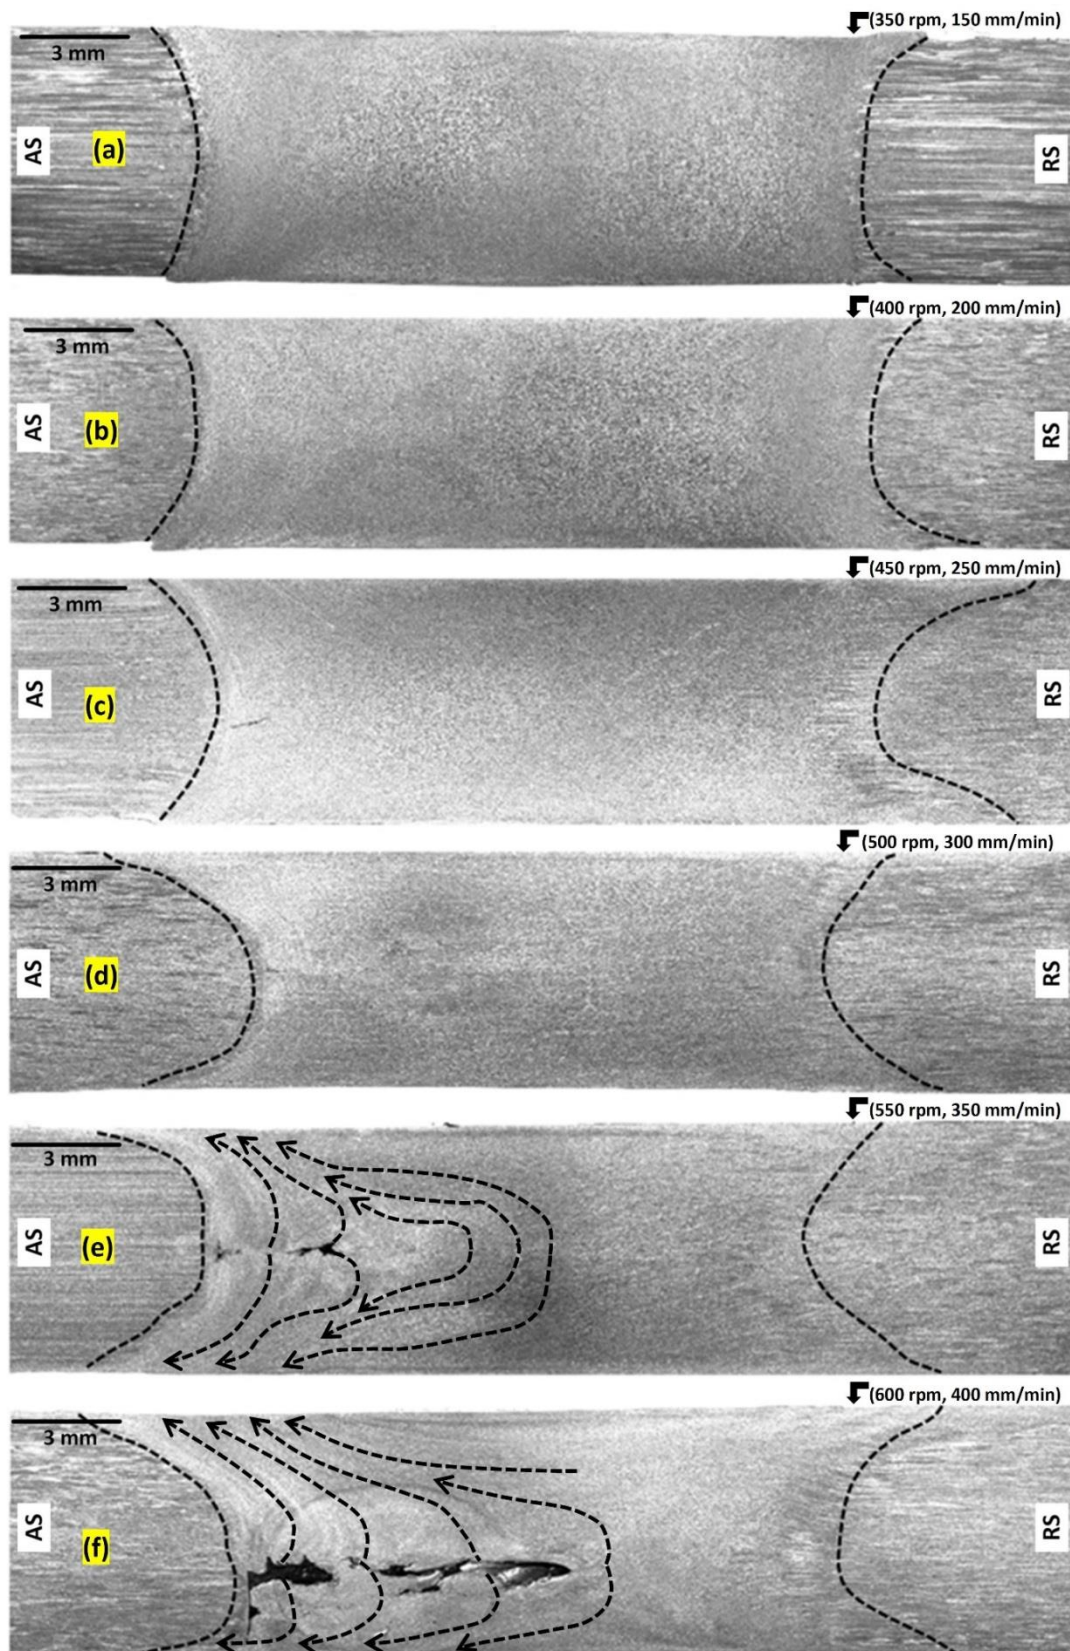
Macro-etched cross-section of the AA3003 BFSW weld samples in different welding speeds; (a) 350 rpm, 150 mm/min, (b) 400 rpm, 200 mm/min, (c) 450 rpm, 250 mm/min, (d) 500 rpm, 300 mm/min, (e) 550 rpm, 350 mm/min, (f) 600 rpm, 400 mm/min.
